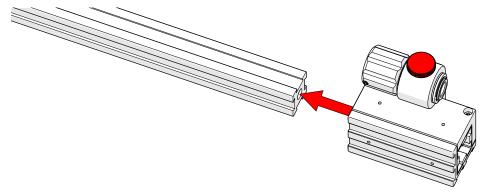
Place slider on frame bar and loosen slider lock knob
